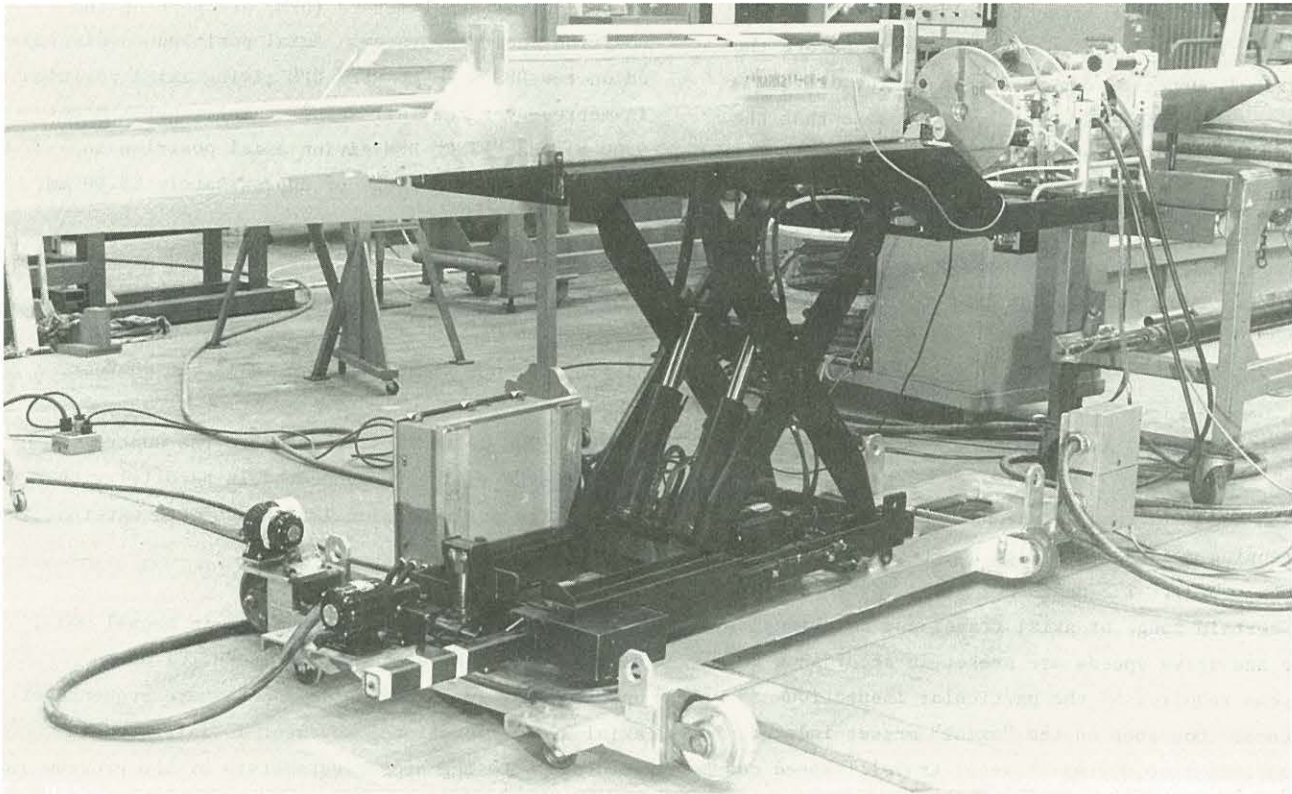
CONVEYOR ALIGNED WITH THE DRIVE SYSTEM CLAMPED TO THE END FITTING DURING TESTING
